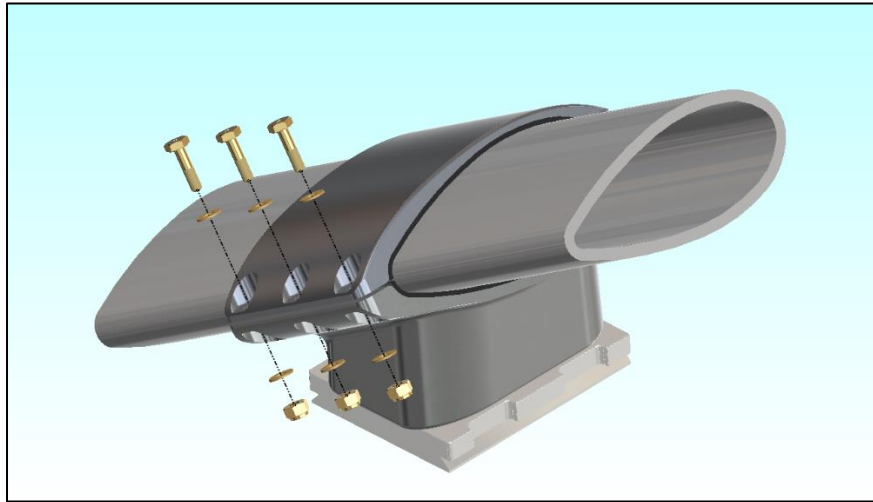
Installation of the AFWM Wing Mount Assembly onto the Cessna Aircraft Wing Strut.
